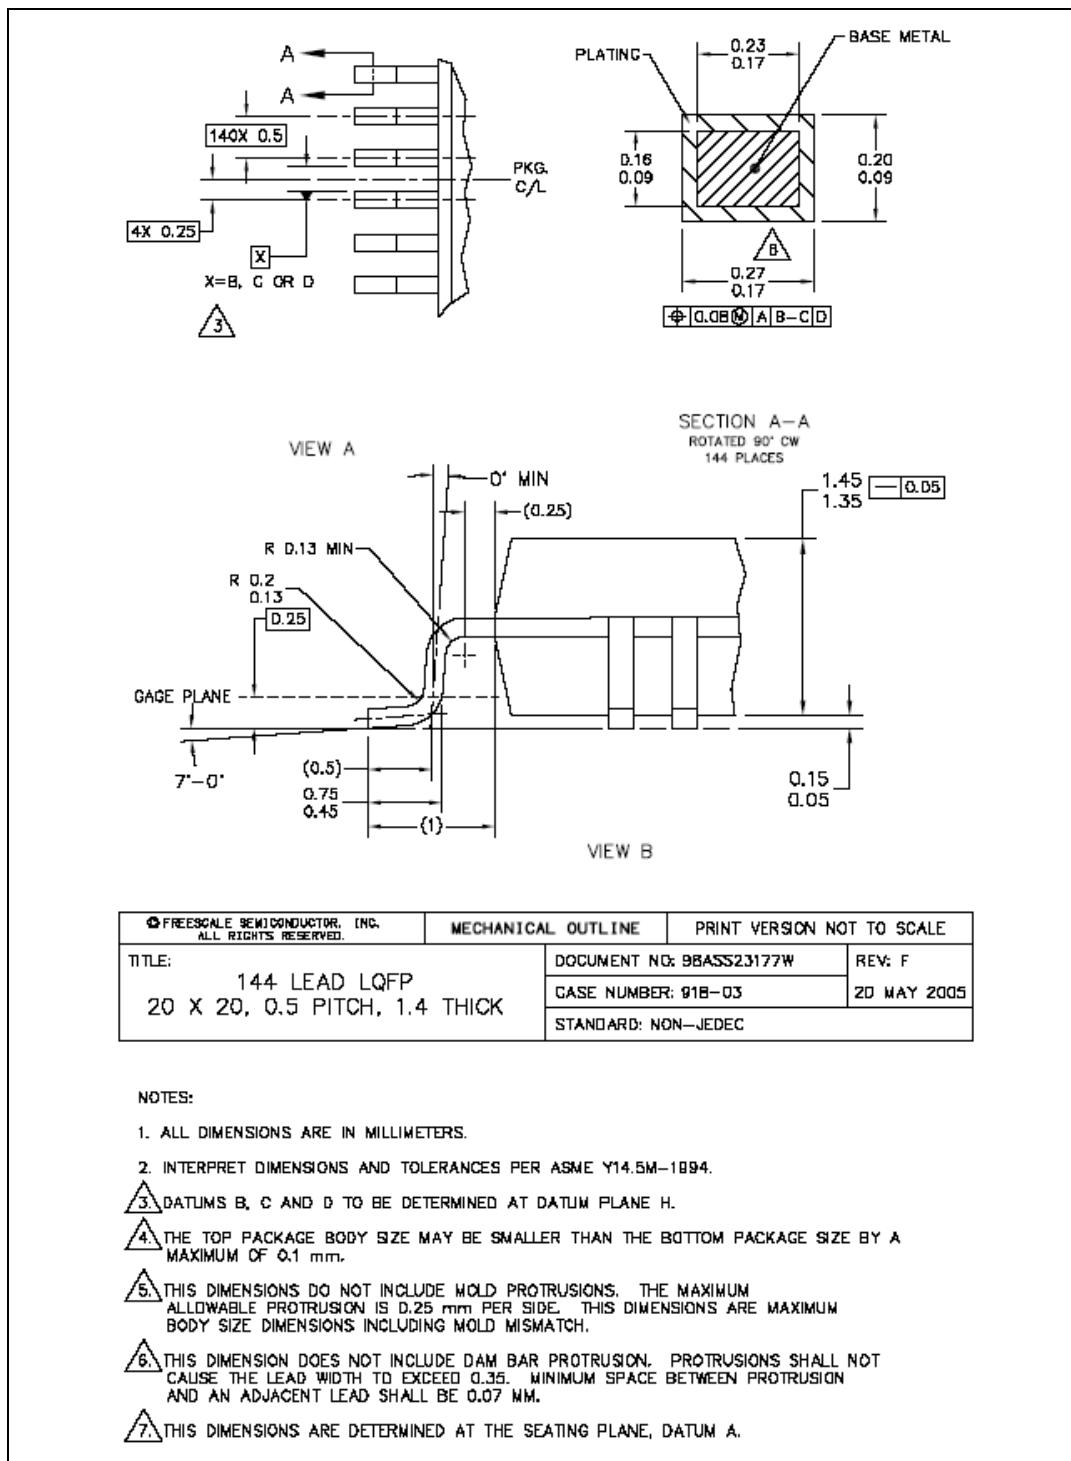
144 LQFP package mechanical drawing (2 of 2)
